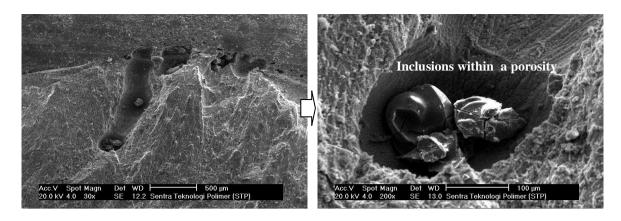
SEM microfractograph of the through fracture surface obtained from the leak area of the weld joint between the header and the side bar/parting sheet, showing some inclusions within the weld defect.
